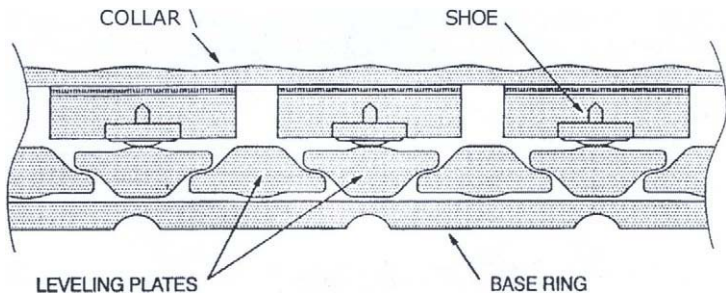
Self-equalizing tilt-pad thrust bearing (View - looking down on assembly) (Courtesy of Kingsbury, Inc.)
